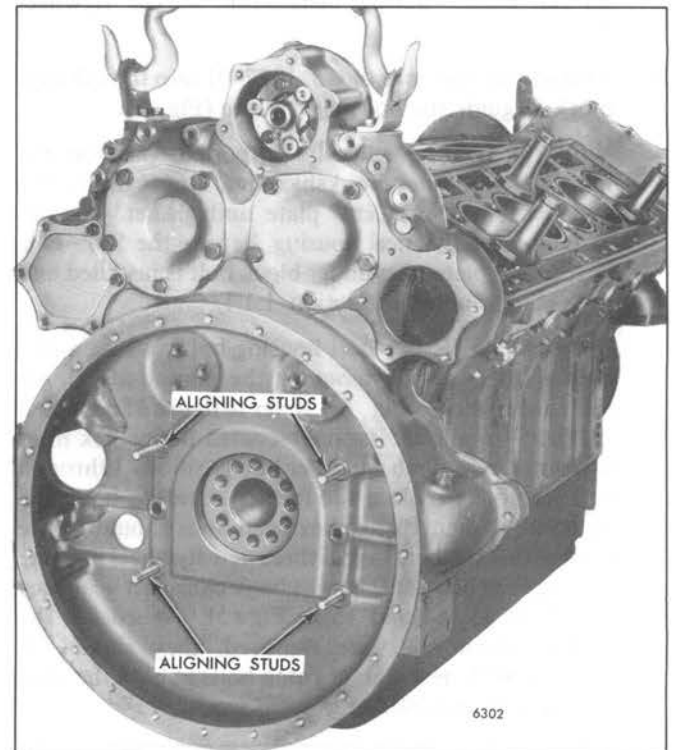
Installing Flywheel Housing, Using Oil Seal Expander Aligning Studs
